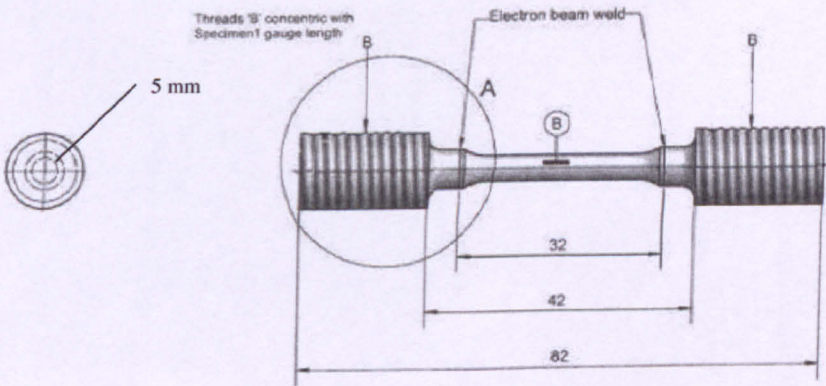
Sketch of single-pass specimen no. 13/26
